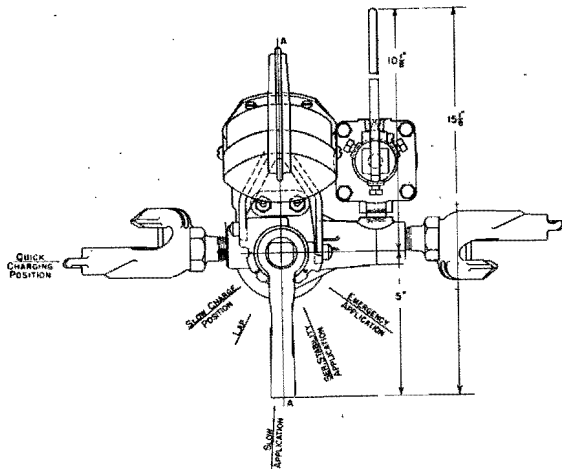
Views from Assembly Drawing of the Single Car Testing Device
